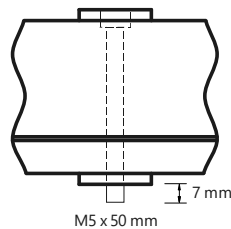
Mechanical mounting of the pr.PIMA using a screw
